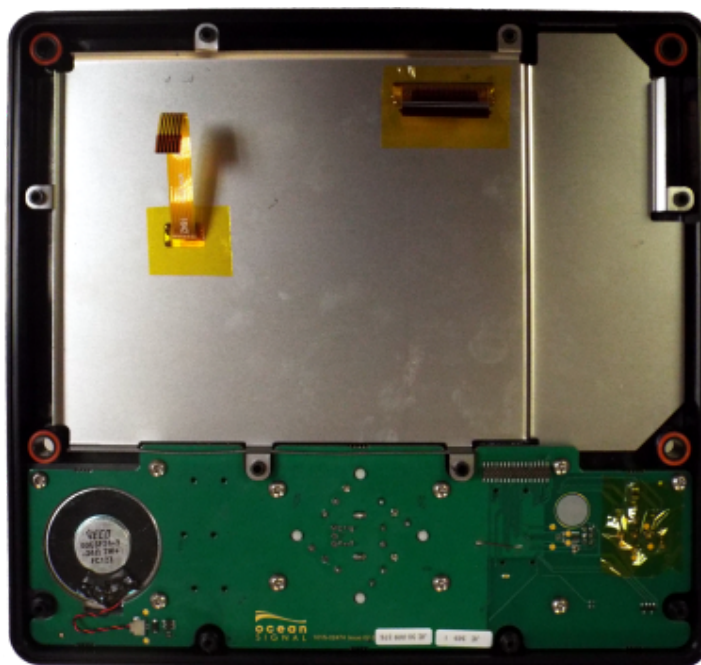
Inside Case view with main PCB removed Showing LCD and screen and Keypad PCB.
